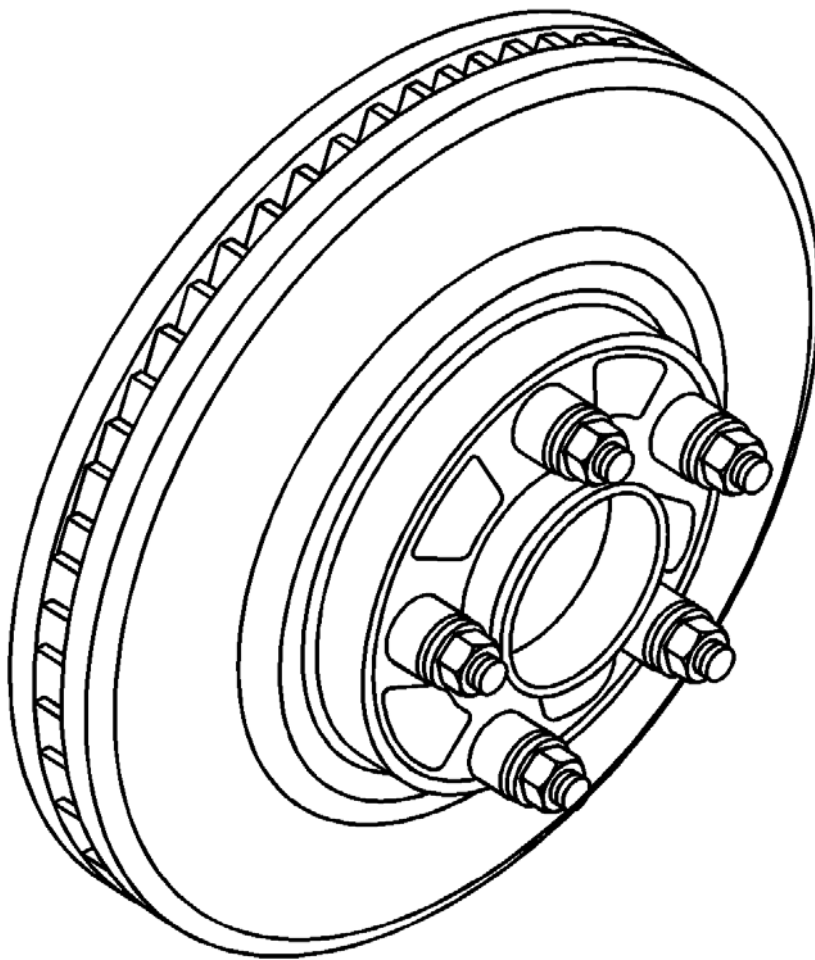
Conical Brake Rotor Washers And Lug Nuts
